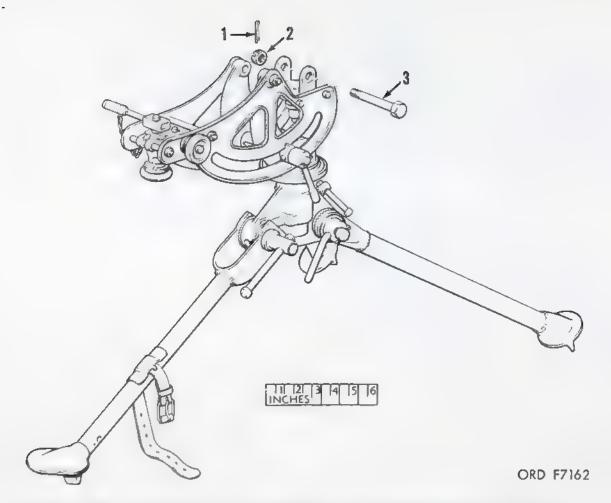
Repair parts for machine gun tripod mount M1917A1.
